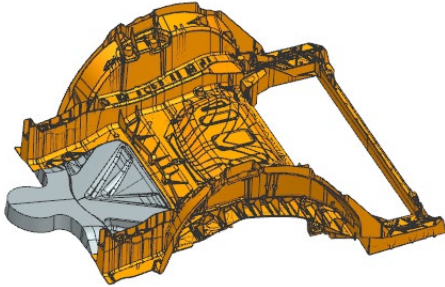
Cast aluminum giga casting and gating design for HIDC casting process.
